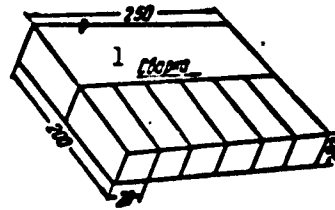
Composite specimen used to evaluate tendency of welded seam to form hot cracks originating from spaces between "keys." 1) Welding.
